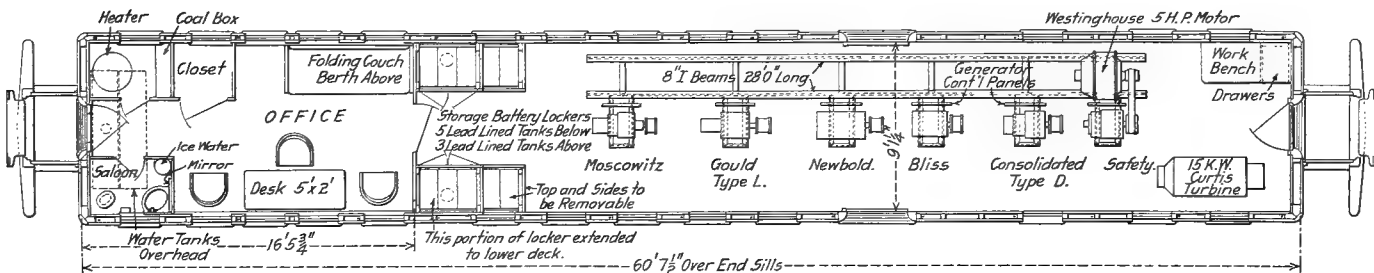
Floor Plan of Pennsylvania Railroad Train Lighting Instruction Car.
